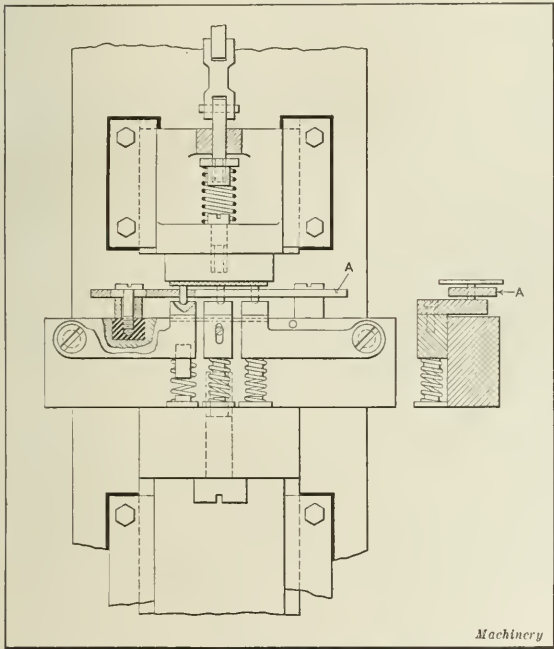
Diagram illustrating Principle of Machine employing Three Electrodes for welding Pins to Sheet Steel—Compensation is made for Variation in Length of Pins
